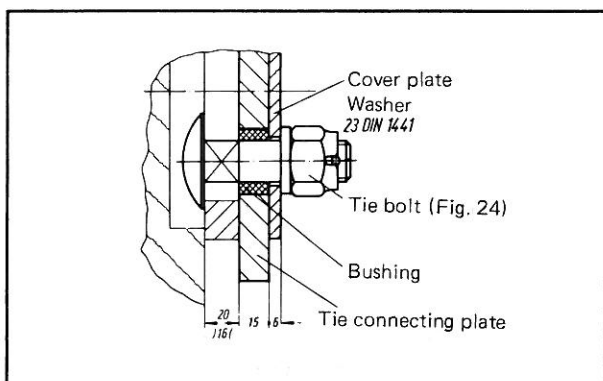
Section through tie connecting plate mounting when attached to non-insulated switch
